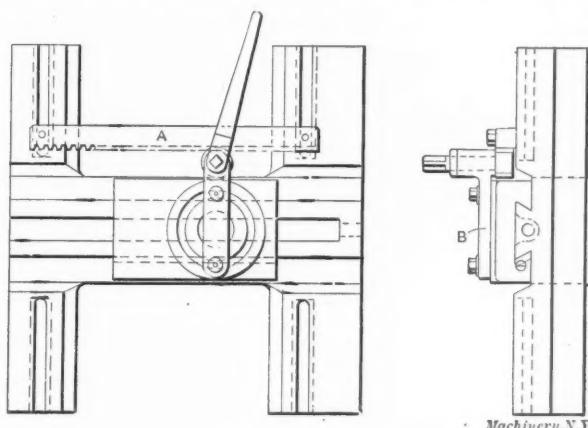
Method of Attaching Rack and Pinion to a Lathe Rest.
